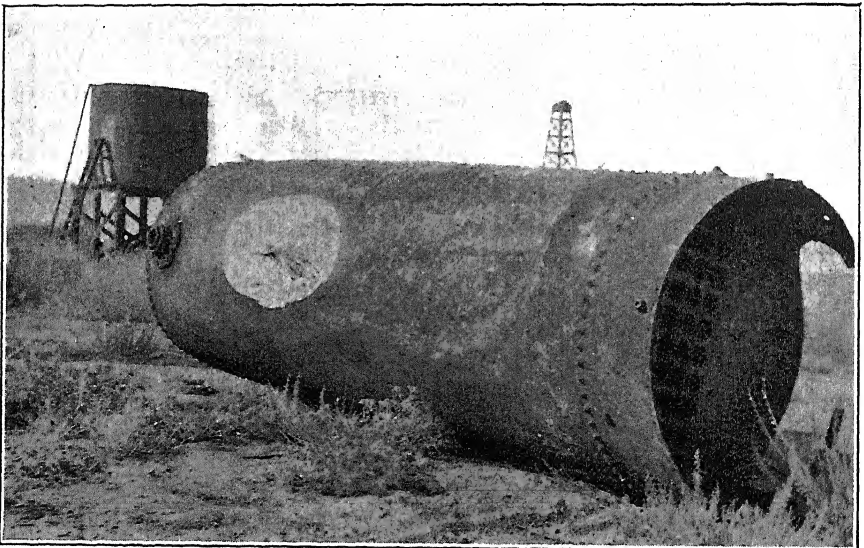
BURNT-OUT BOILER, SHOWING BAGGING.
